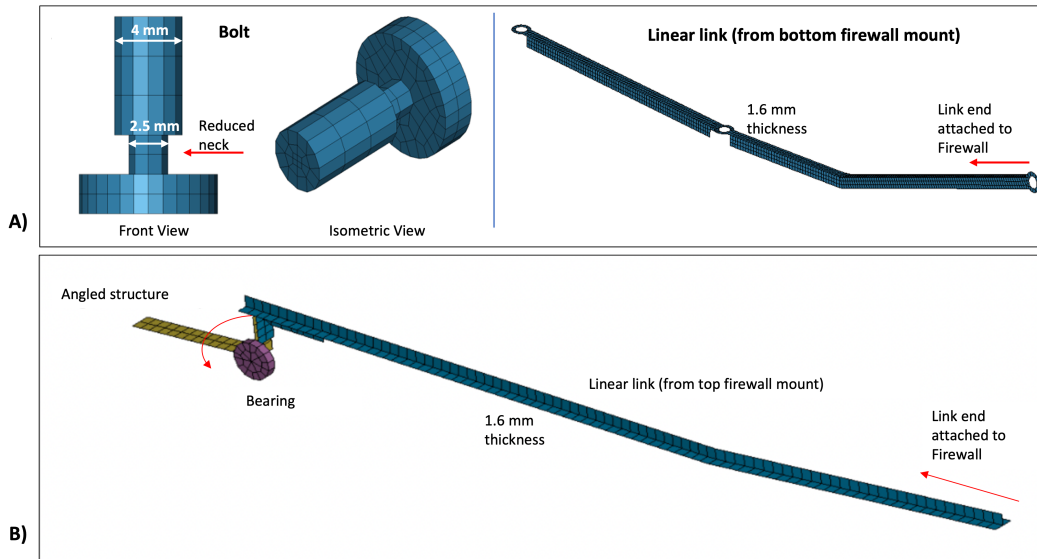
A) Reduced neck bolts and linear link for shearing payload mount bolts and B) mechanism for deviating the payload impact trajectory.
